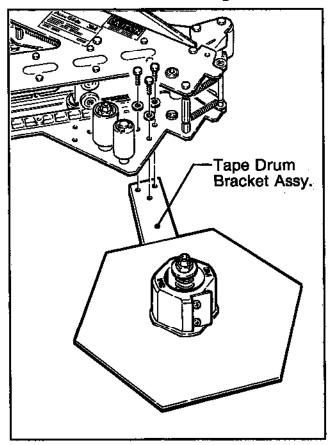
Tape Drum Bracket Assembly - Optional Mounting
